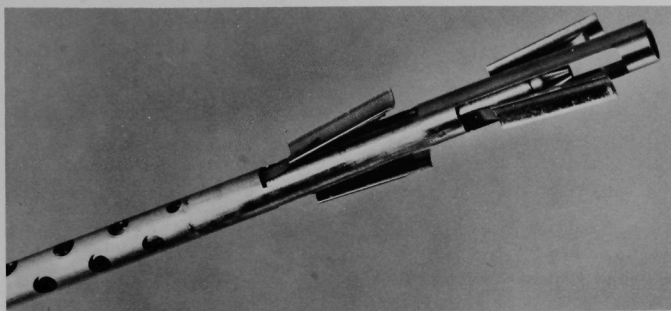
Mounting-unit Assembly. ANL Neg.
